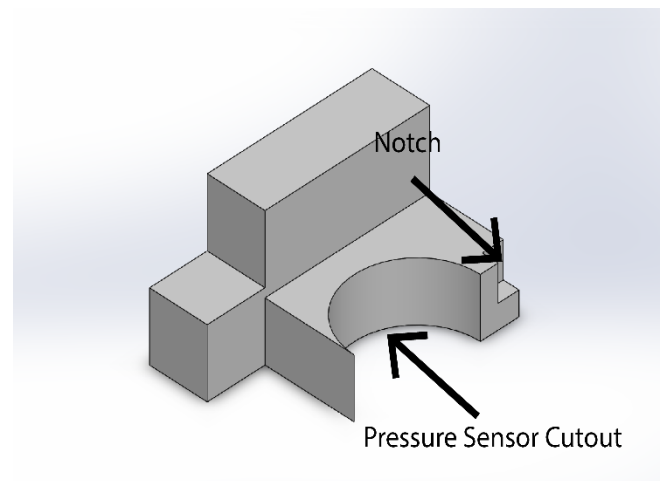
Center piece of connector designed to attach to a PAP machine.
